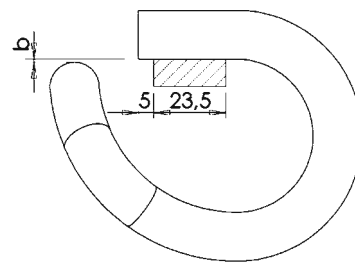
Dimension “b” of the SB4 spring clip measured with a base plate 23.5 mm wide and 5 mm from the end (method B) [Fig. A. Aniszewicz]
